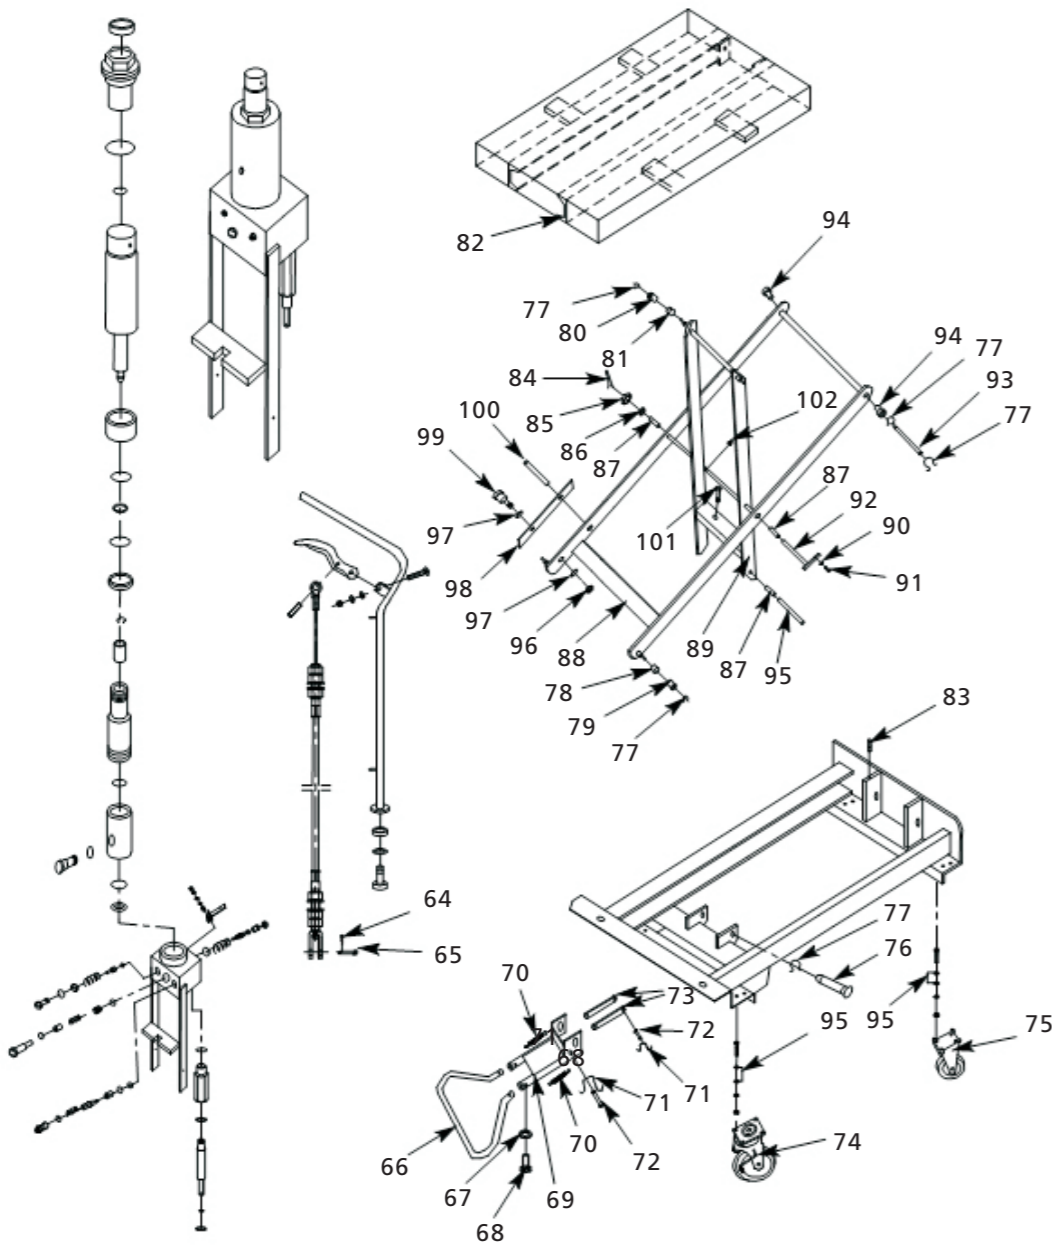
Repair Parts Illustration for Roller Transfer Scissor Carts (Model 33W286 and 33W287-Continued)
